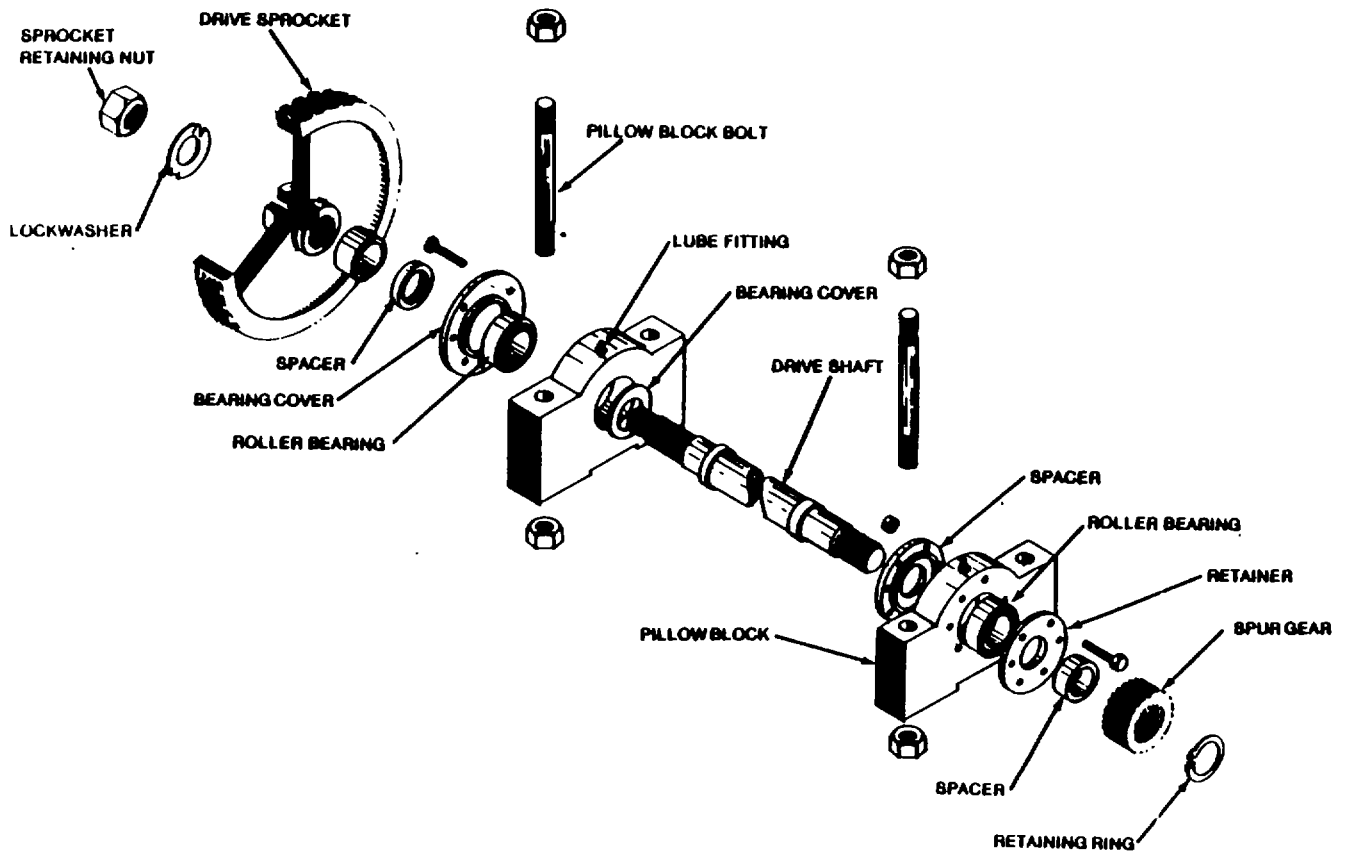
Drive Shaft Disassembly and Reassembly.
